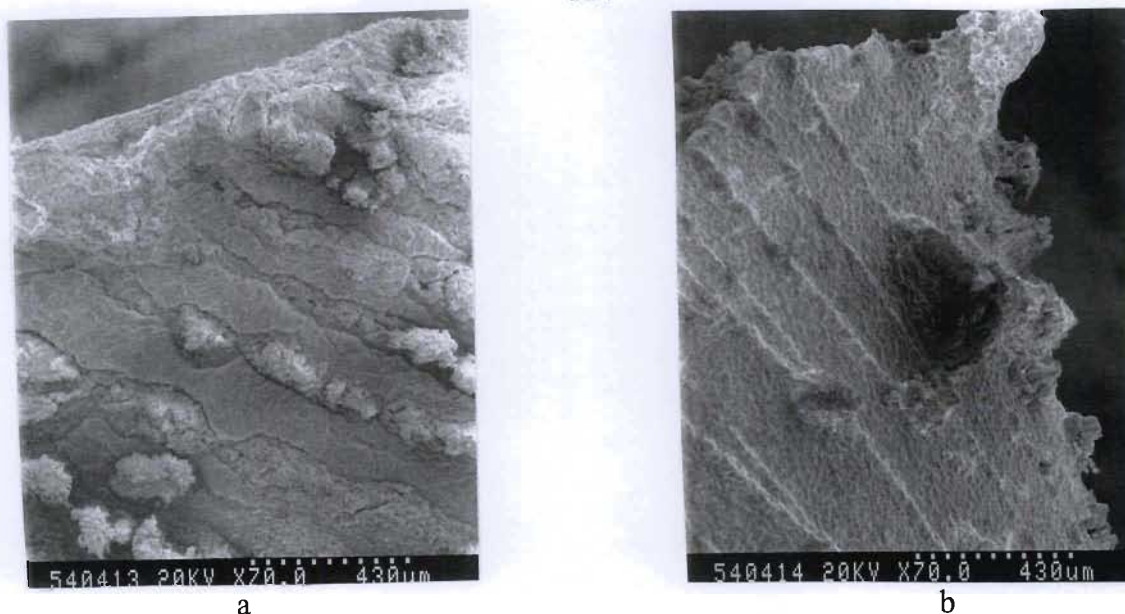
Fractography showing severe cracking of the coating close to the fracture surface in TYPE II platinum aluminide coating after HTLCF in Ar + 5% SO₂ (S.R. 0.38%)
